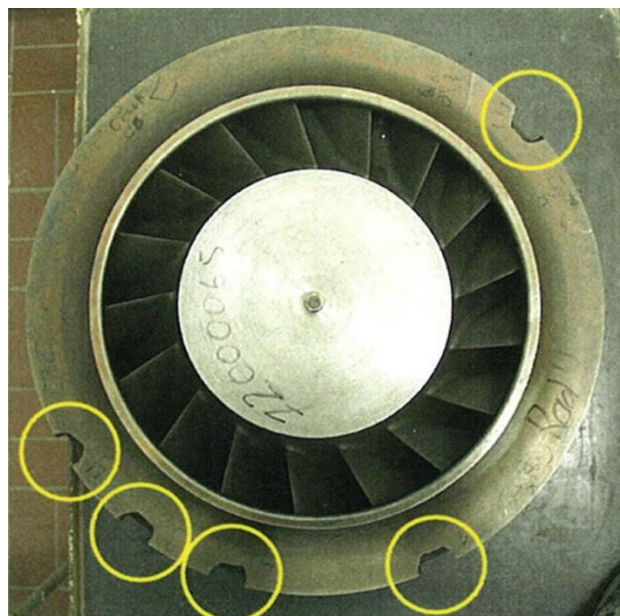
Fatigue Failure on the Shroud disk of a centrifugal compressor impeller [2].
